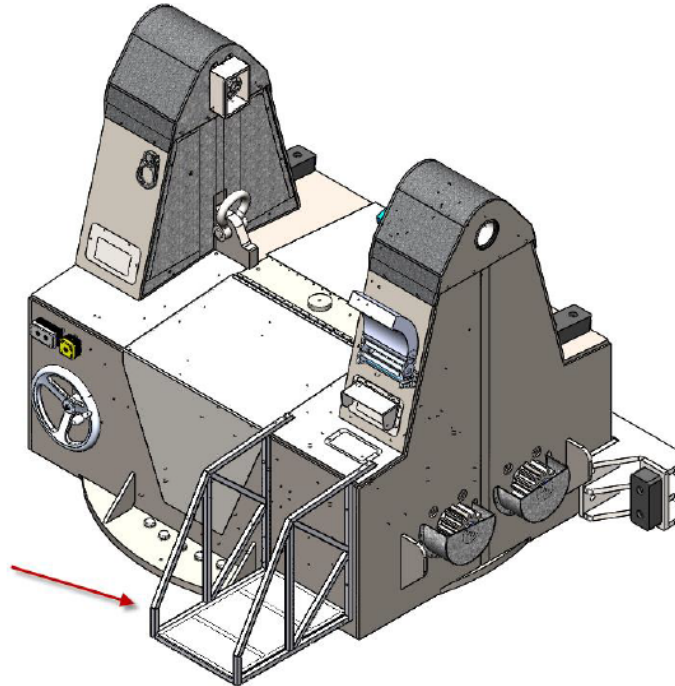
Compressor Mechanical Interface - Space on the Turning Head
